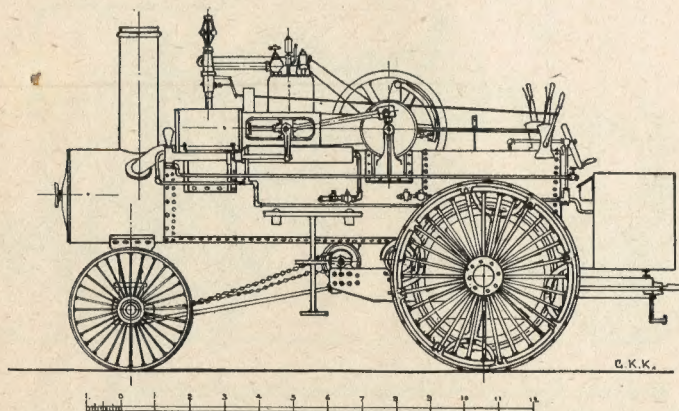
Russell 20 h.p. engine 8½ in. bore \times 12 in. stroke. Circa 1923
